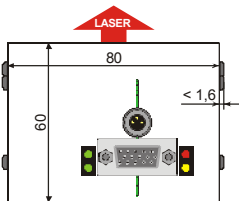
mechanical dimensions (connectors) of the MTE LTDB; all measures in mm
